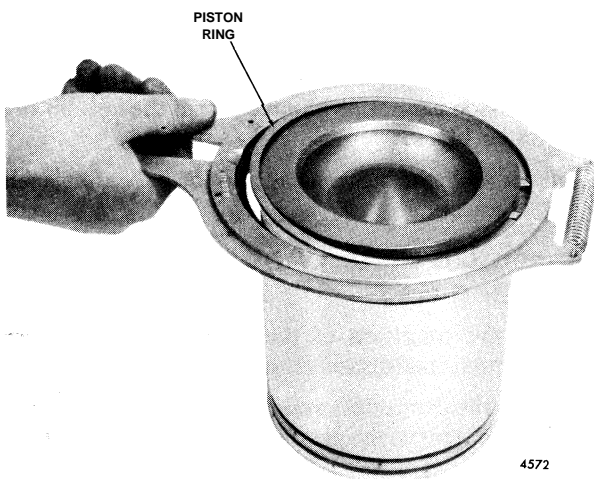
Removing or Installing Piston Rings using Tool J 22405-02
